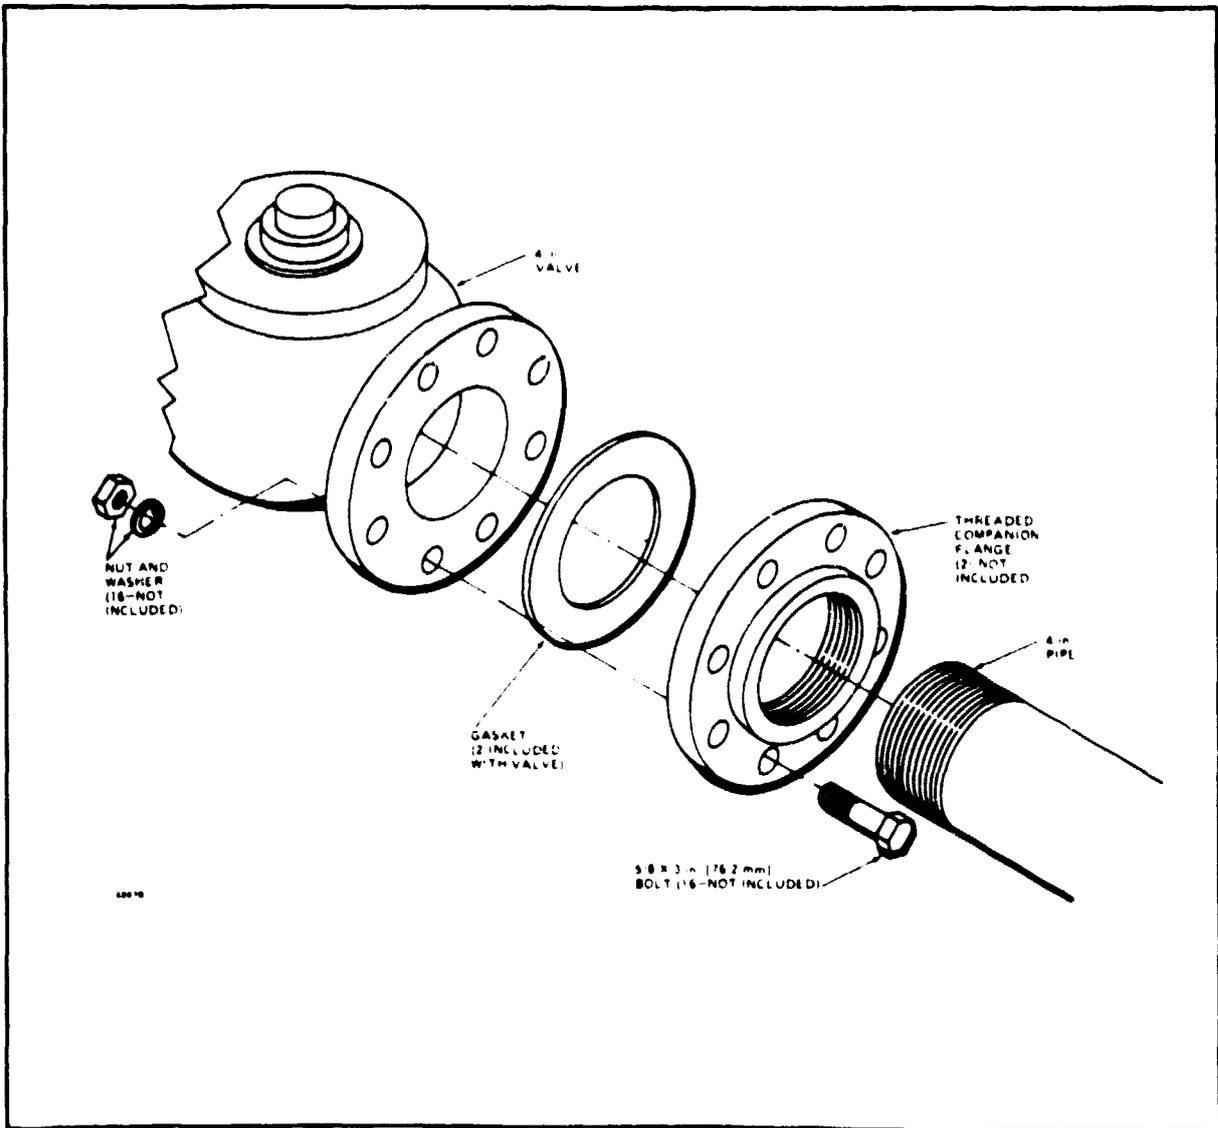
INSTALLING A 4 in. V5055 VALVE.
